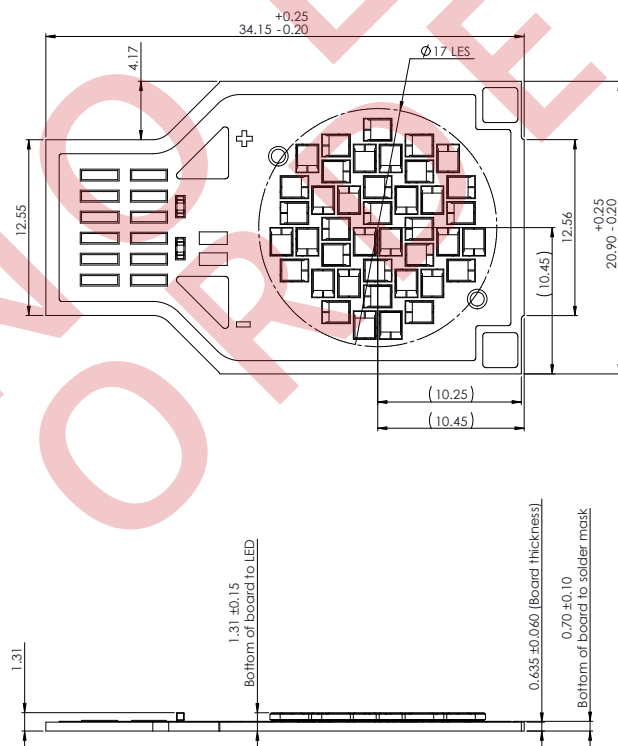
Package outline drawing for LUXEON S5000 / LXSx-Pxxx-004IN (Connector-less).
